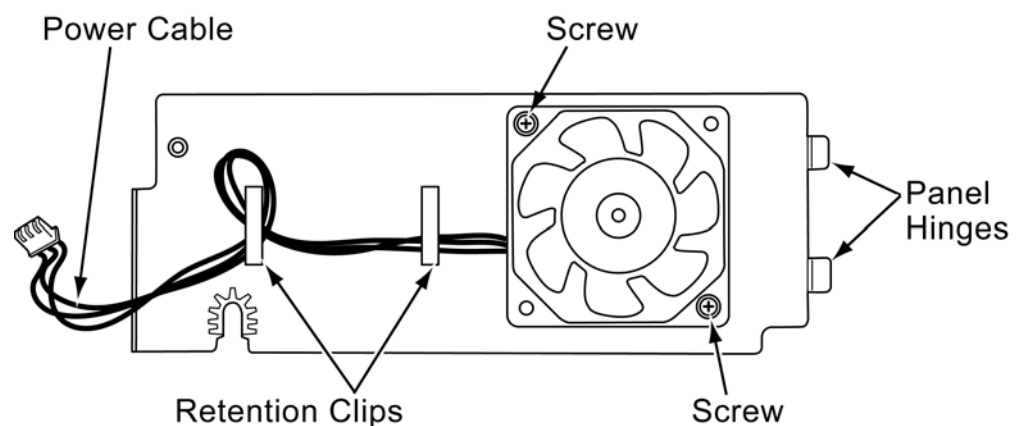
Chassis Access Panel Removed (19" Chassis)
